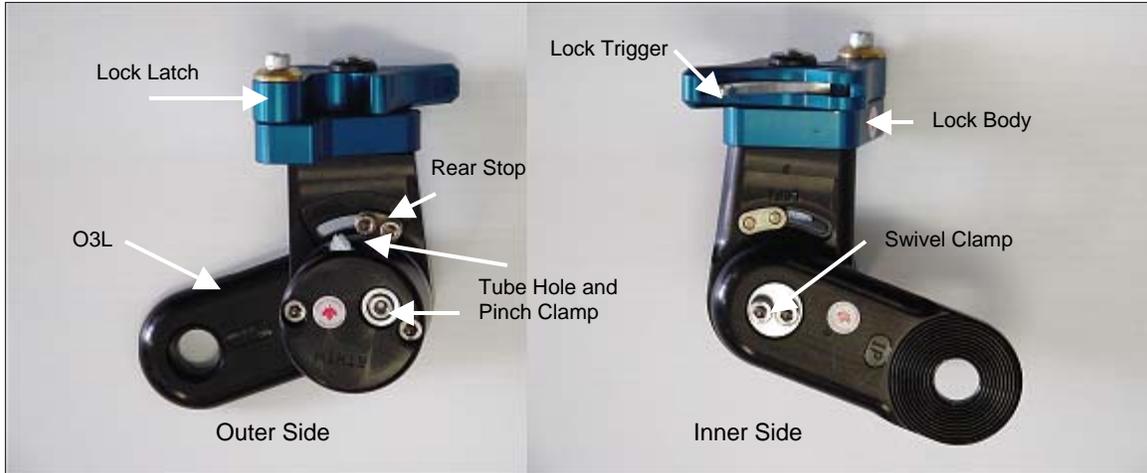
Parts of the Lockable Rear Folding Adapter
